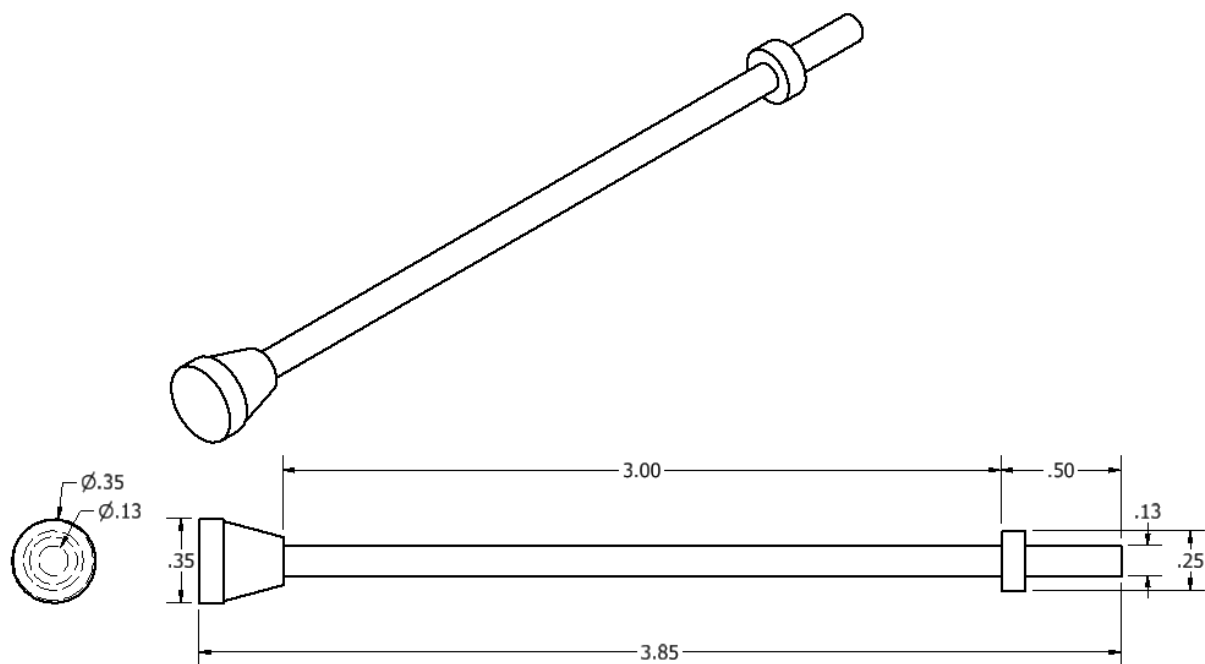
Inner rod for Mark 2 grabber. Dimensions in inches.
